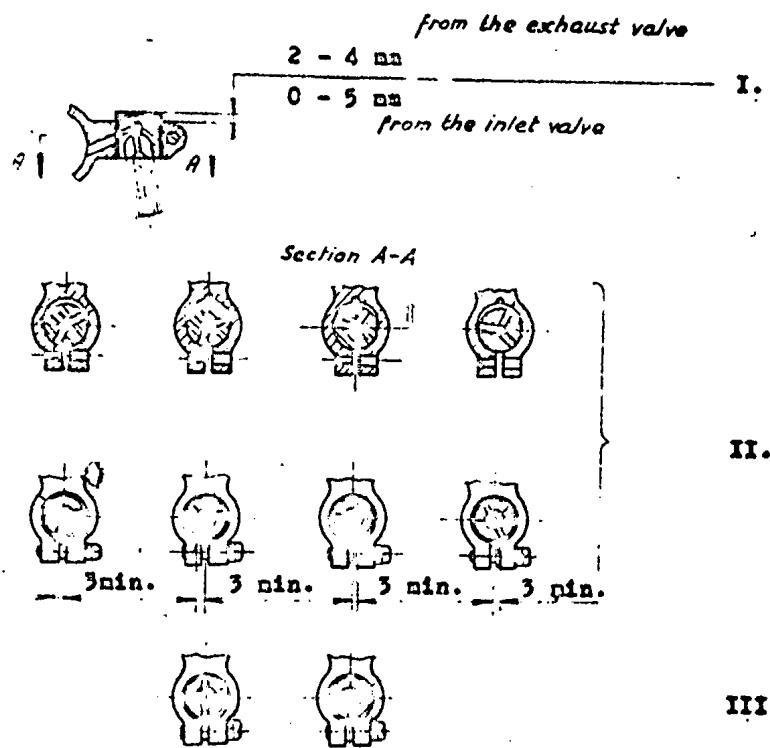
The installation of the valve lever adjusting screws at the adjusting of the clearances between the lever-roller and the valve-seat.
